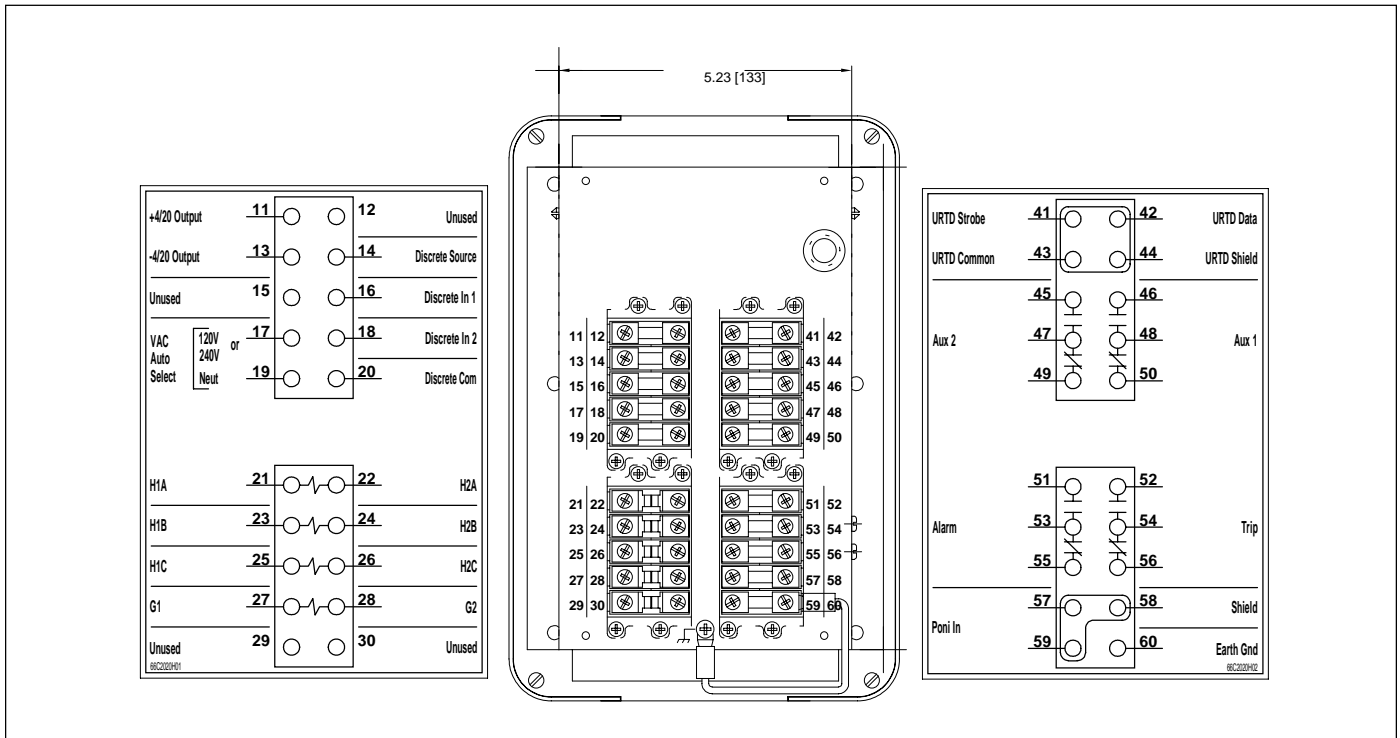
Rear View of MP-3000 Drawout Outer Case
